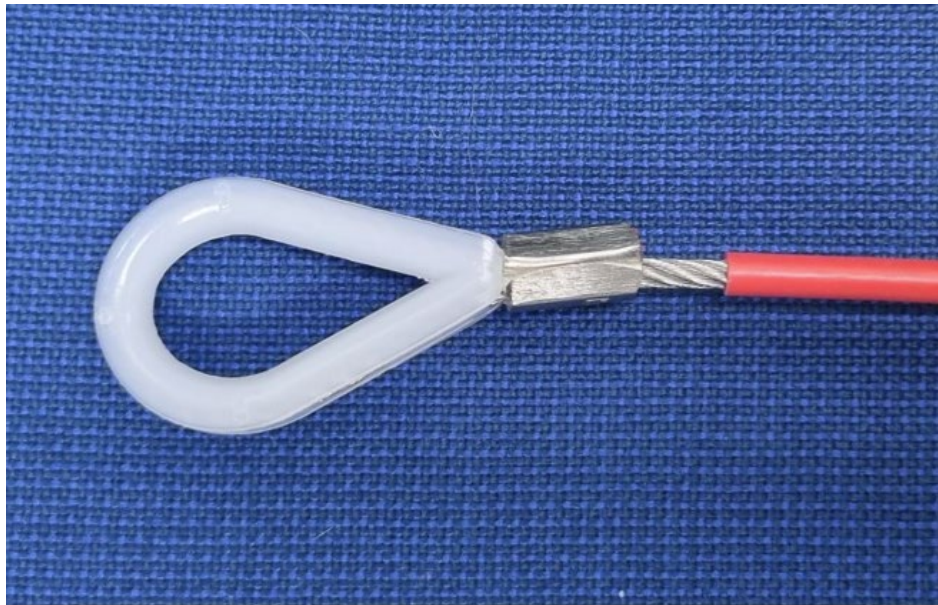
STAINLESS STEEL CRIMP SHOWN. NOTE THE HEXAGON SHAPE.
